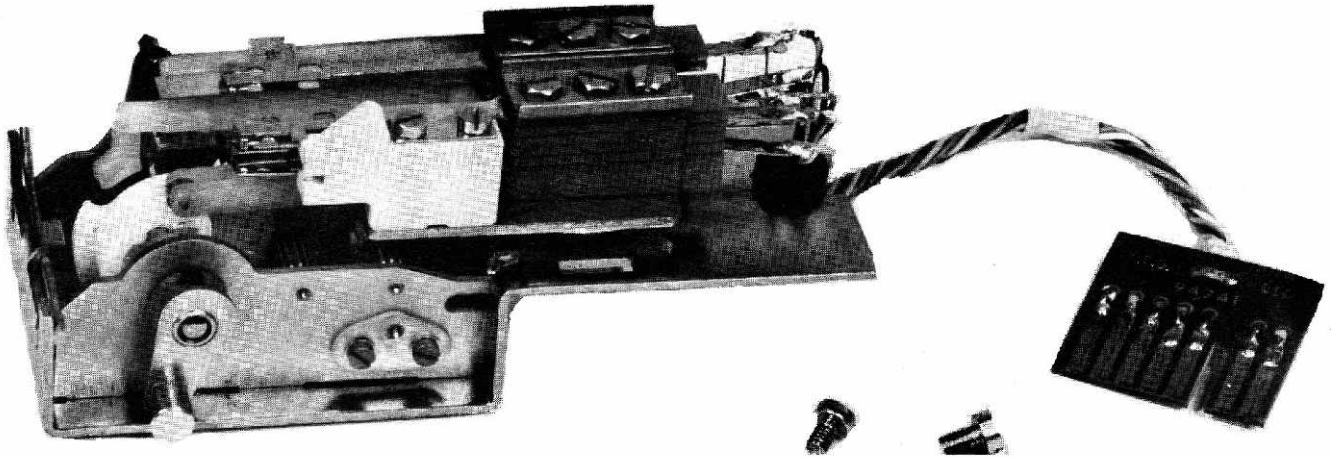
GRAVITY SWITCH DELAY ASSEMBLY.
